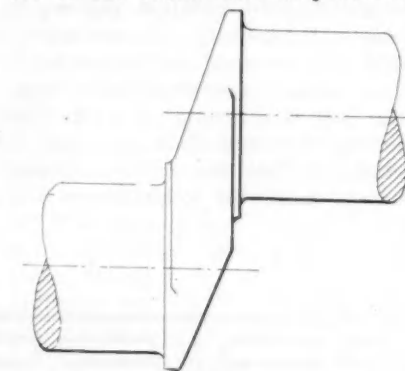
DETAIL SHOWING OVERLAPPING CRANKPIN AND MAIN BEARING AT SHORT ARM OF CHEVROLET CRANKSHAFT
